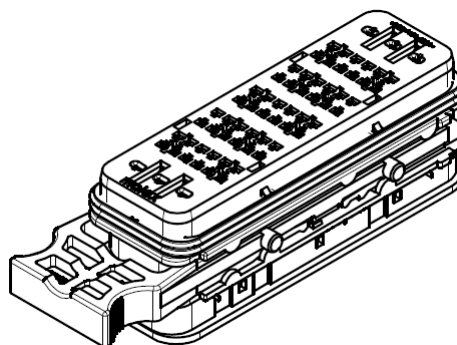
SRC 60+6 Mixed Power Female Receptacle Assembly Housing Mating Interface
